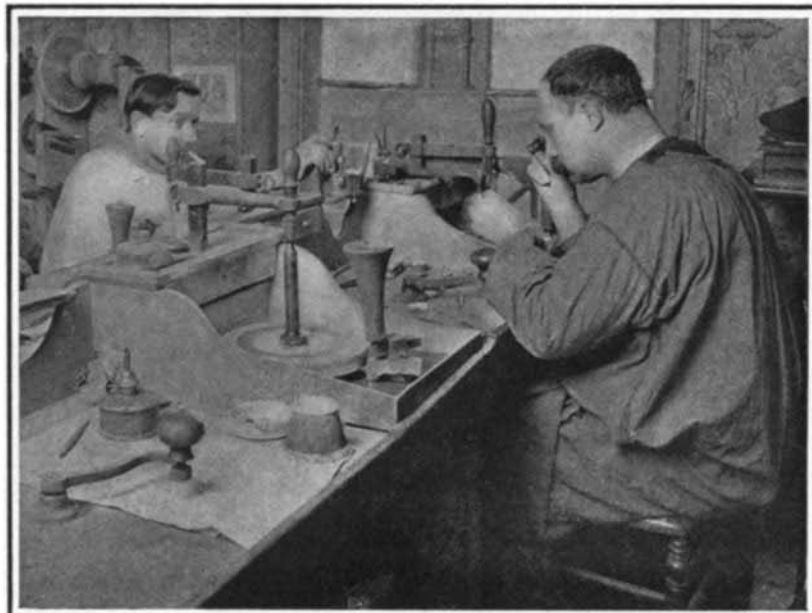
Examining artificial rubies, and mounting them on rods for cutting.
